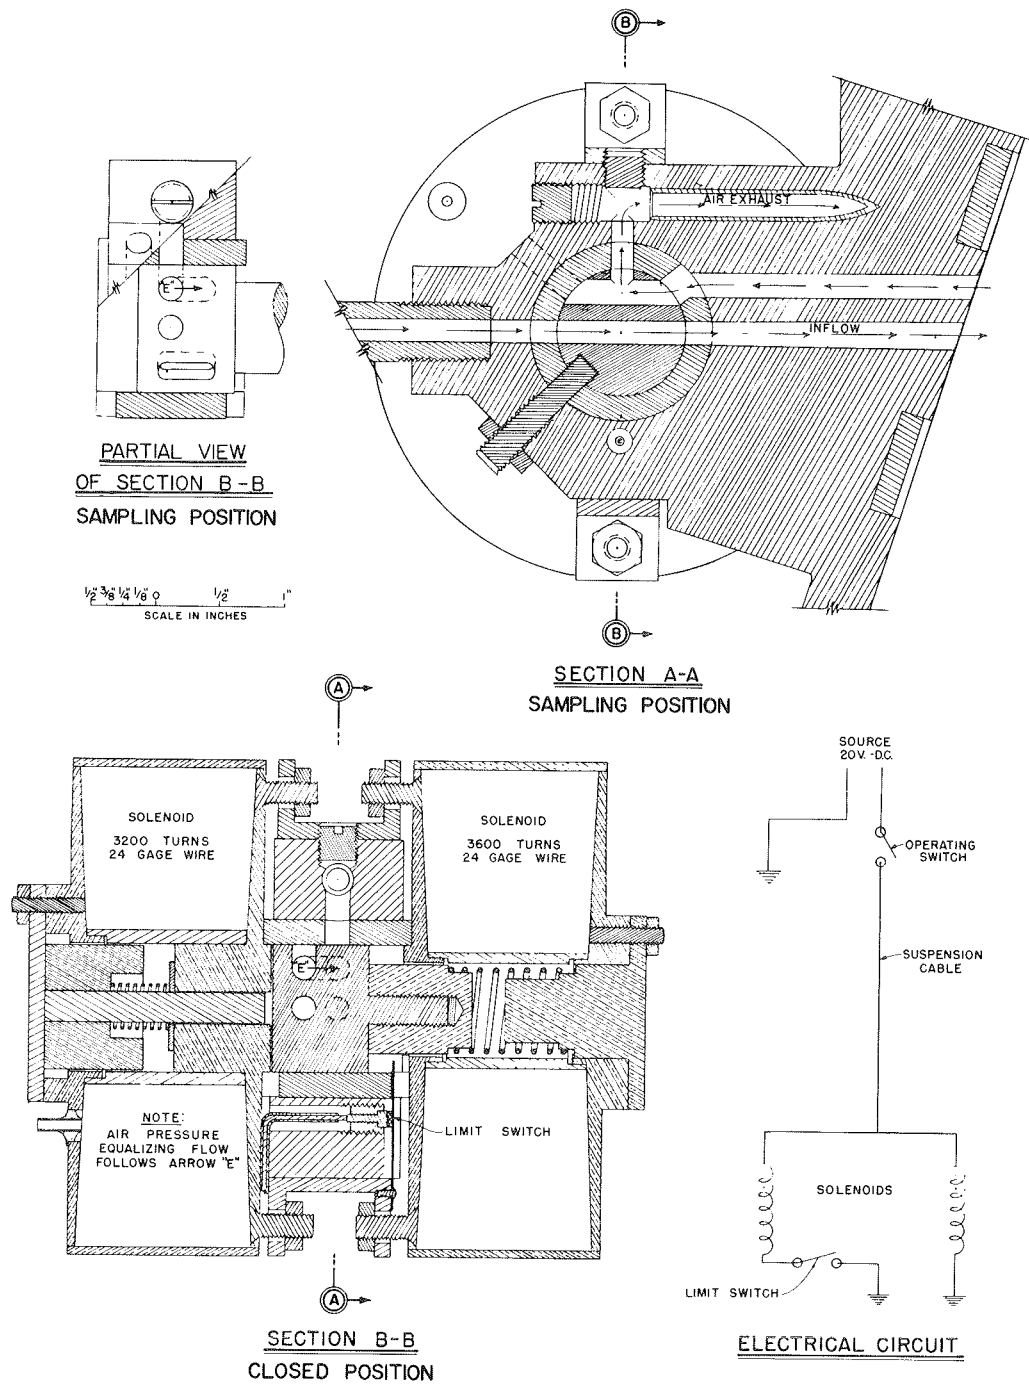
POINT-INTEGRATING SAMPLER, US P-50, VALVE MECHANISM
